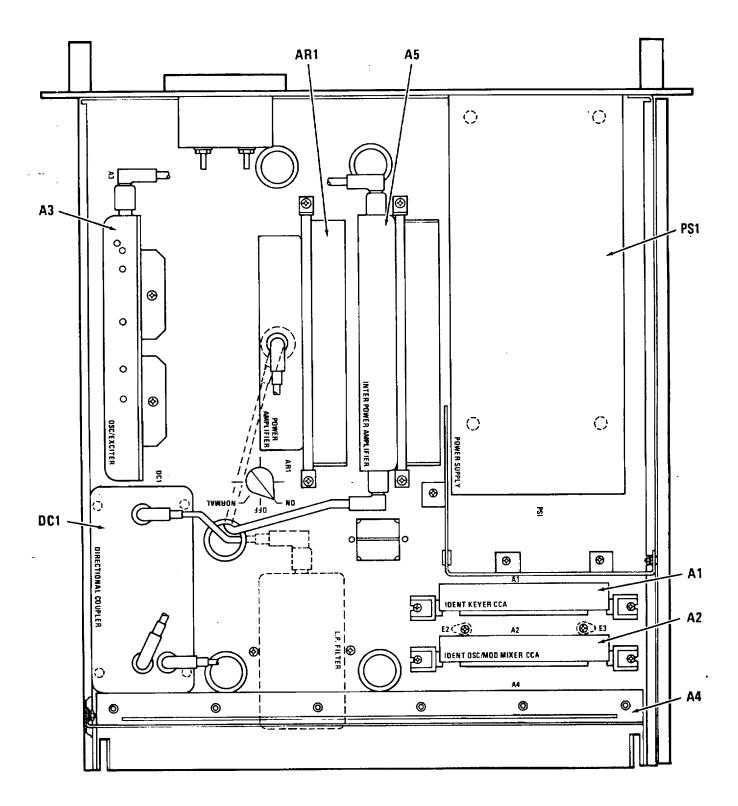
Radio Transmitter Front Panel and Chassis-Mounted Parts Location Diagram (Sheet 1 of 3)
